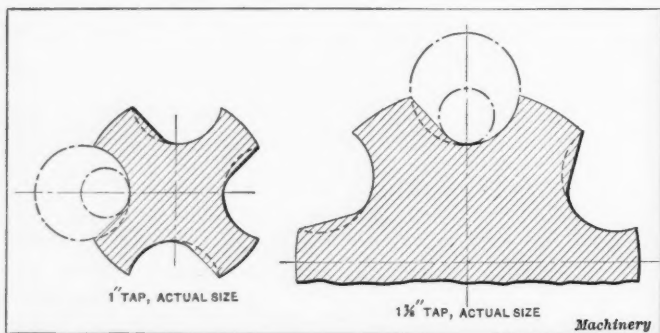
Cross-section of Taps fluted with Proposed Type Fluting Cutter
